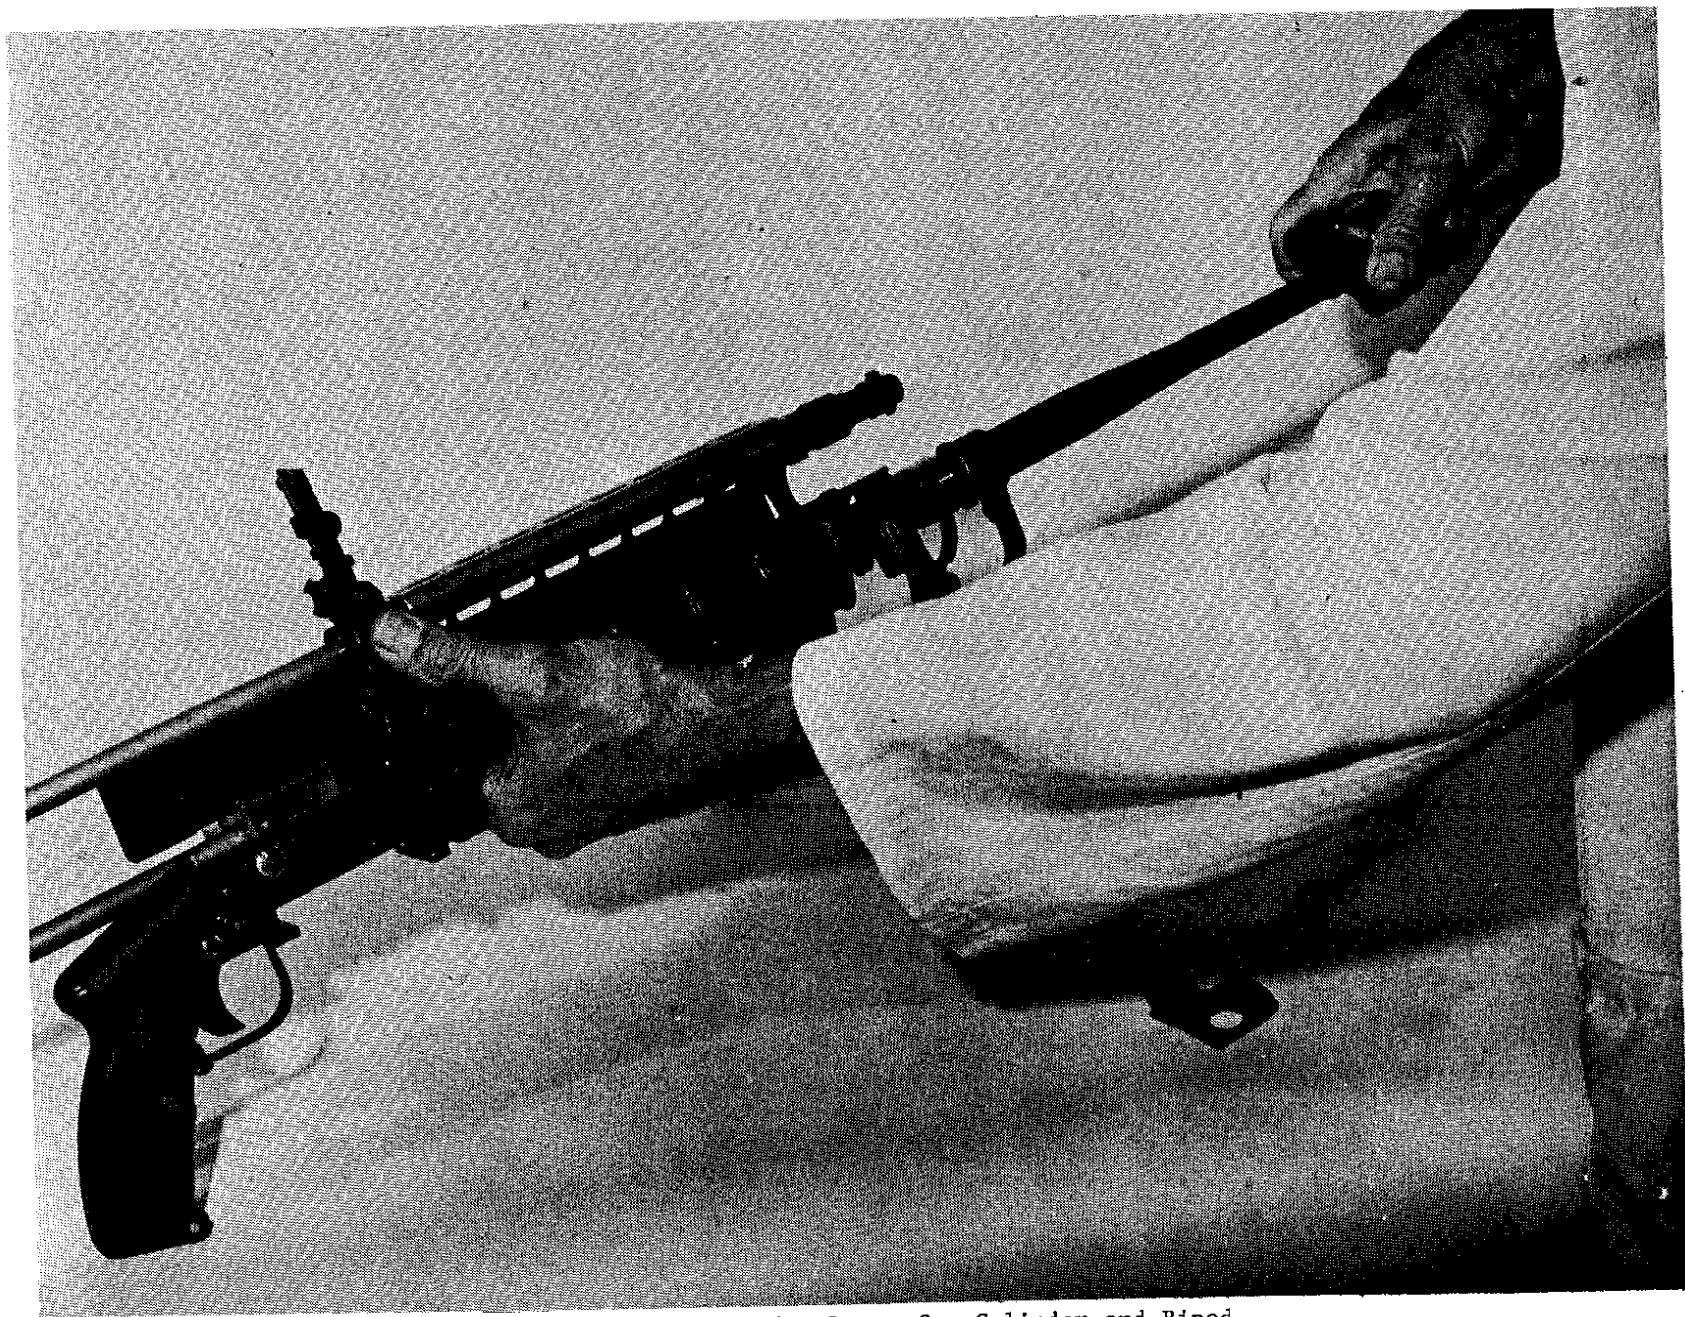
Removing Lower Gas Cylinder and Bipod
